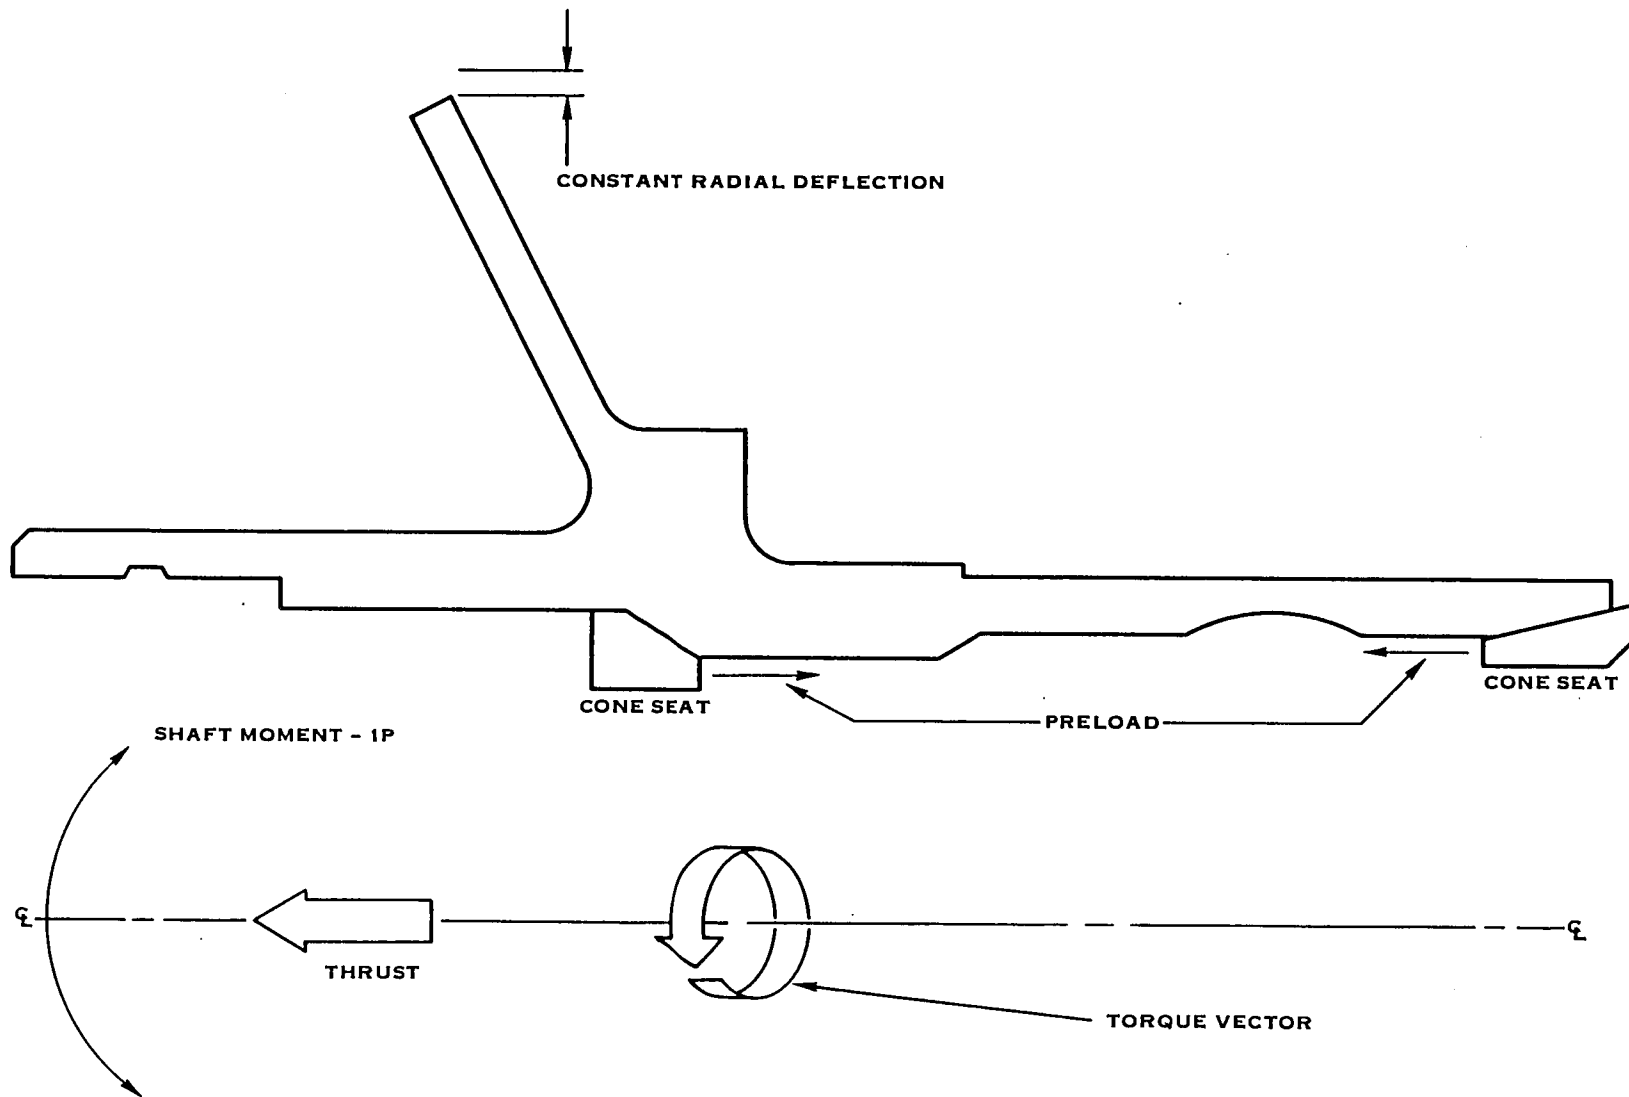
TAILSHAFT LOADING (ON CROSS-SECTION)
